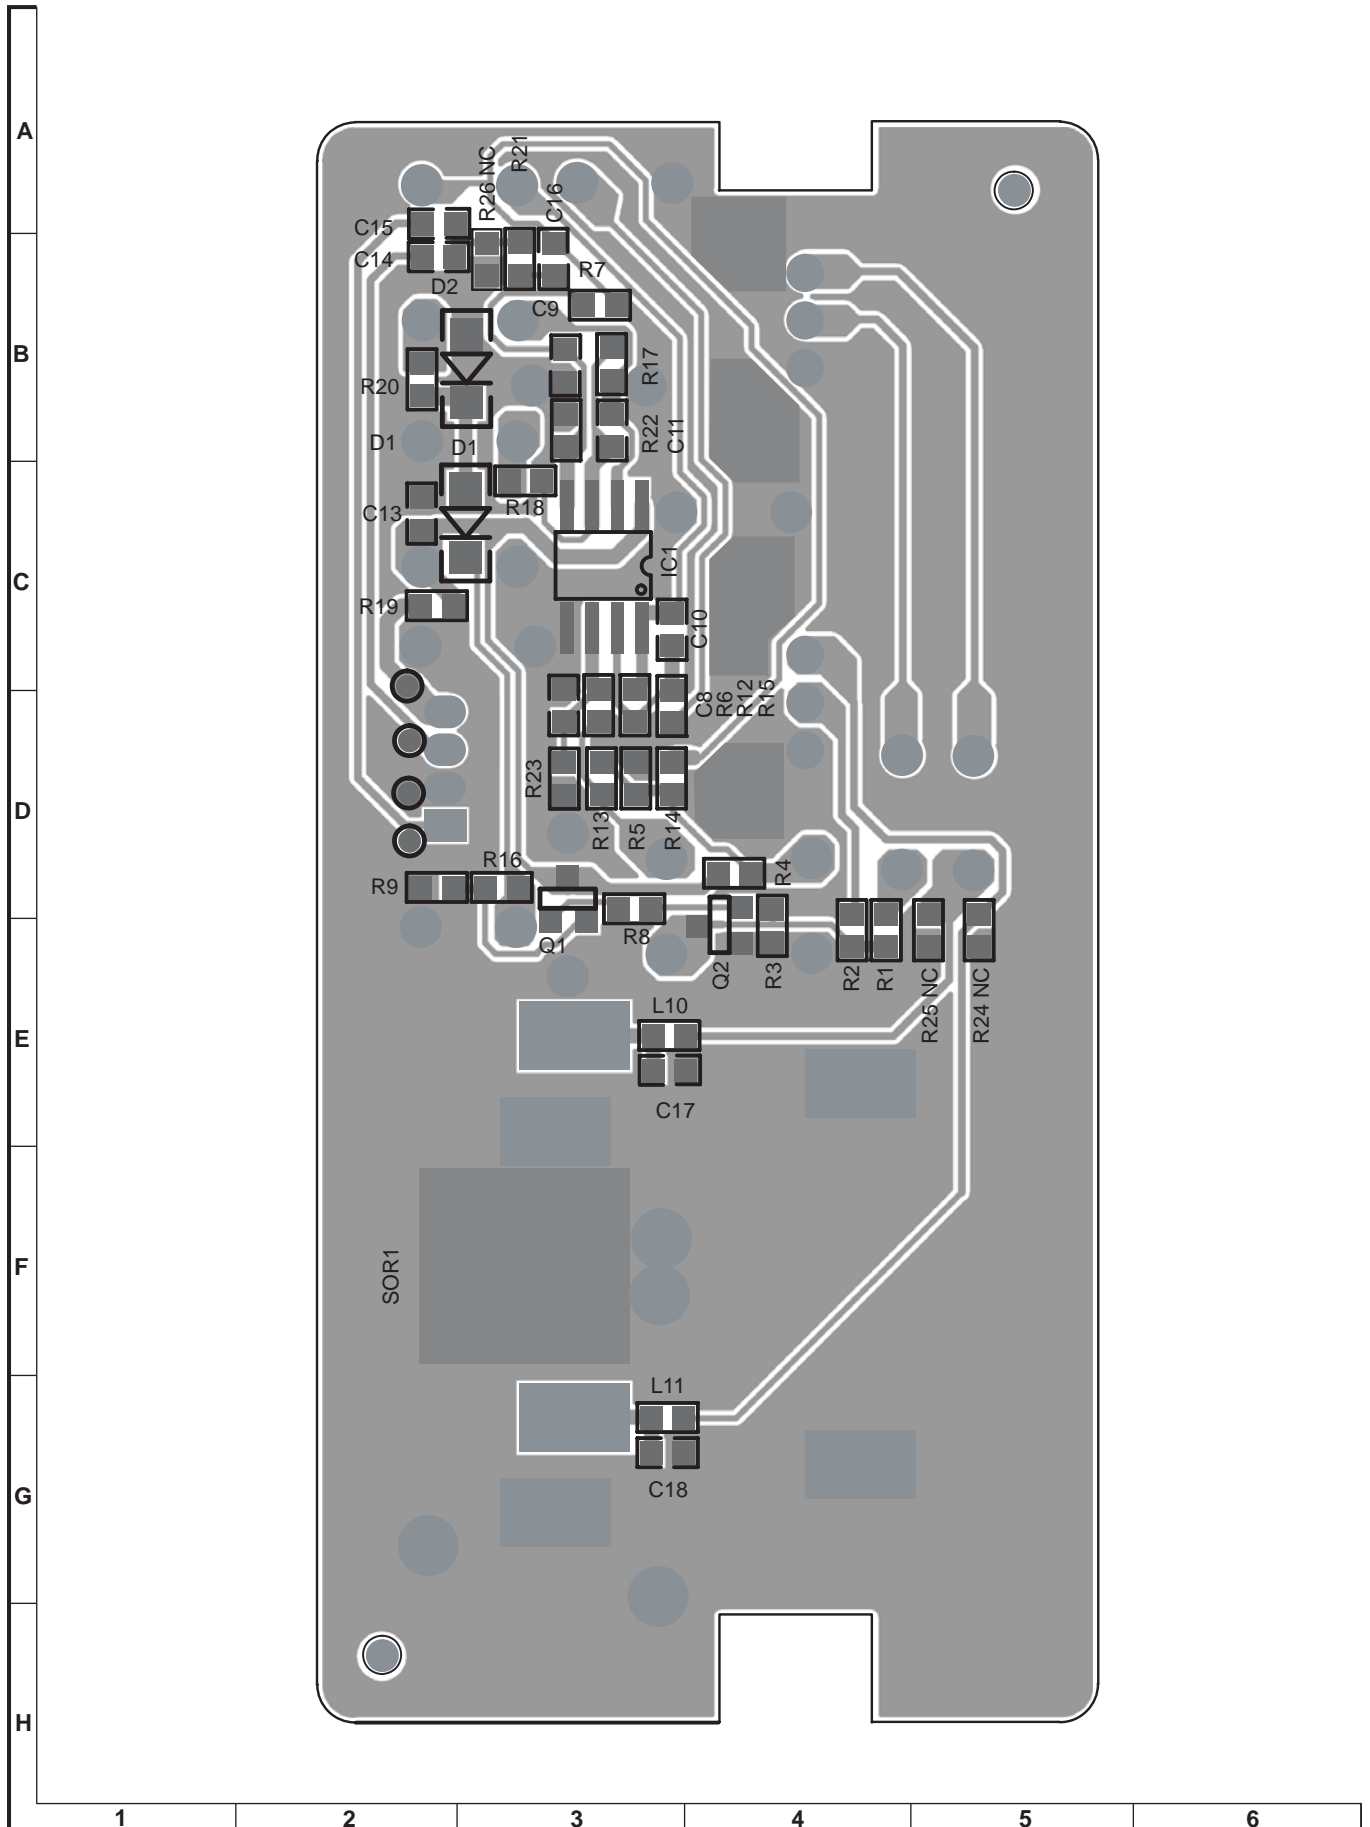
WIRING SIDE OF KARAOKE PCB (BOTTOM VIEW)
